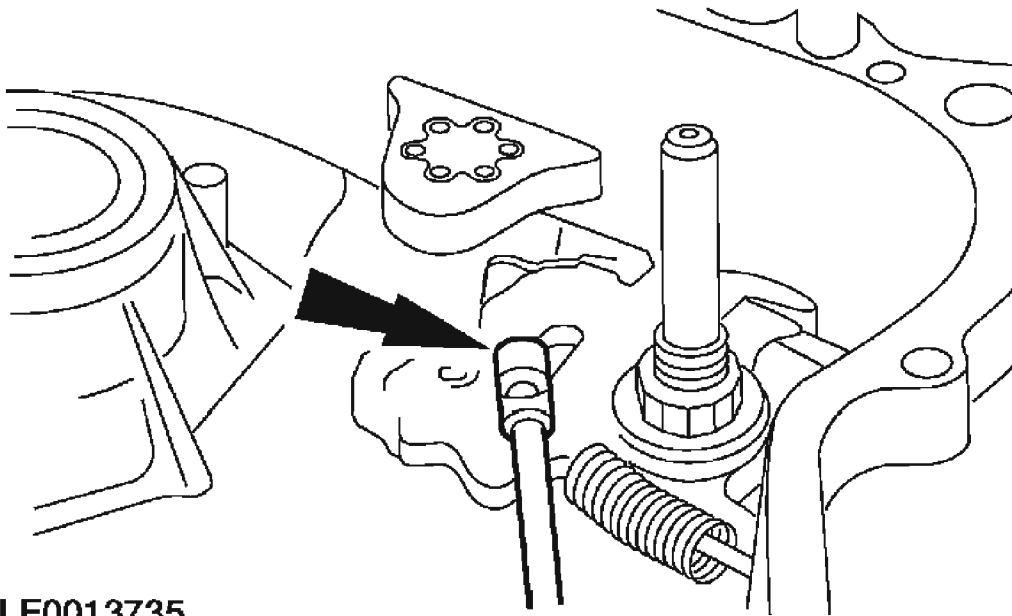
Removing No 12 Driven Sprocket Bearing
